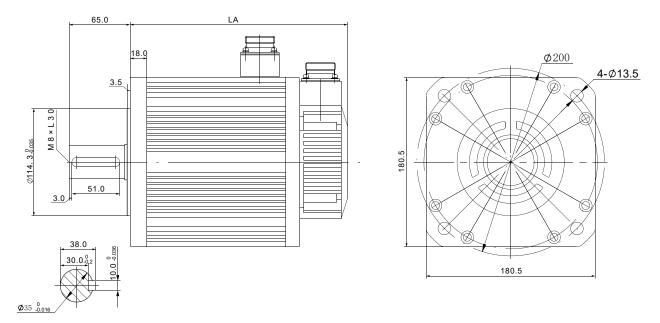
Installation dimension drawing of WE series 180 flange servo motor
